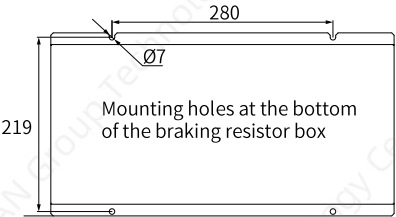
Locations and dimensions of mounting holes at the bottom of the braking resistor box (Unit: mm)
